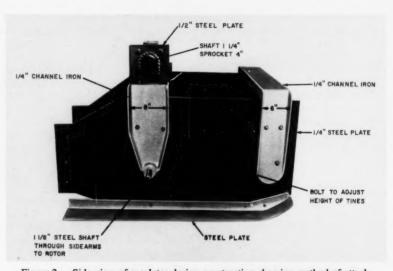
Side view of escalator during construction showing method of attachment of hydraulic drive motor and details of frame construction.
